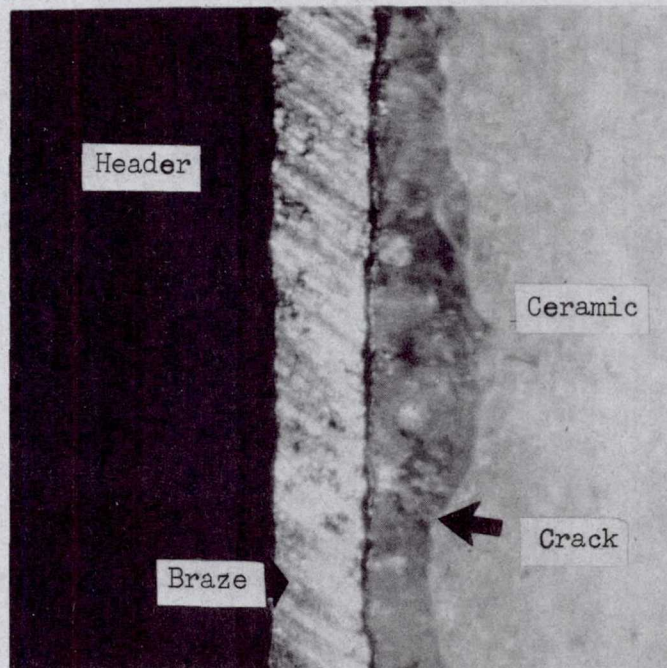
Section of Ceramic-to-Metal Seal Showing Crack in Ceramic Parallel to Braze Surface
